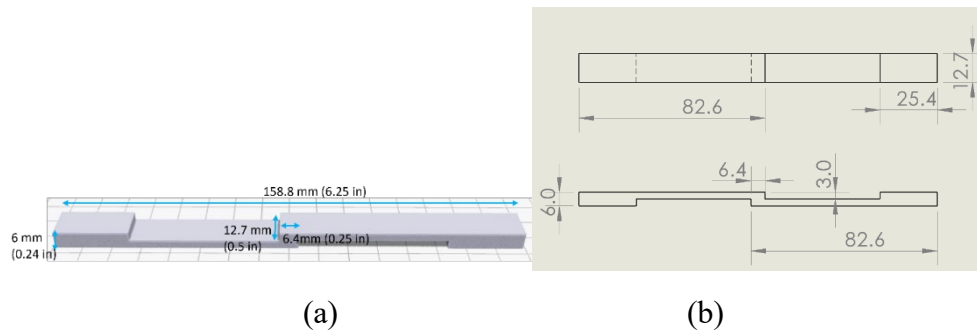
Single-lap joint specimen design, (a) isometric view, (b) engineering drawing. (Unit: mm)
